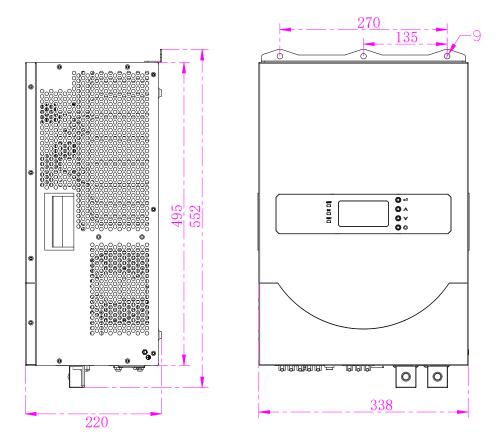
4000W $\,\widetilde{}\,6000$ W integrated machine installation dimensions
